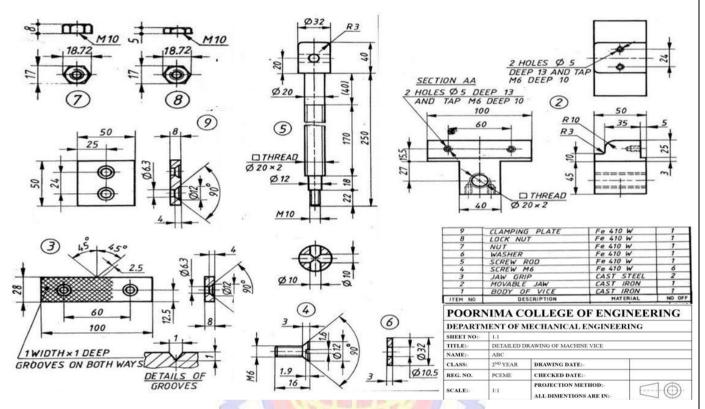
Detailed Part drawing (Machine Vice- Part-II)
